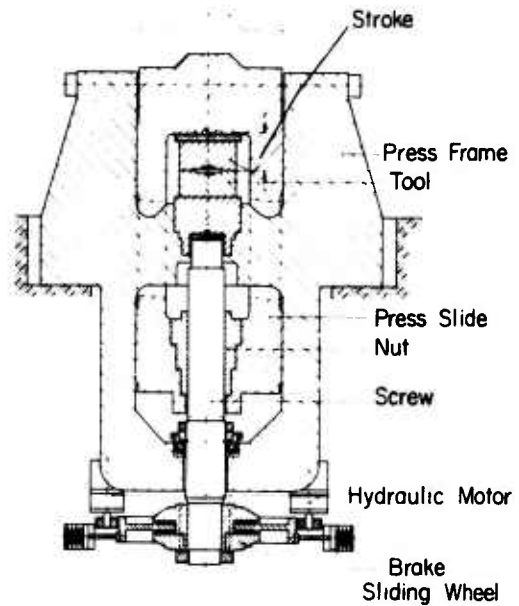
HYDRAULIC SCREW PRESS WITH UNDERFLOOR DRIVE⁽⁹⁾
